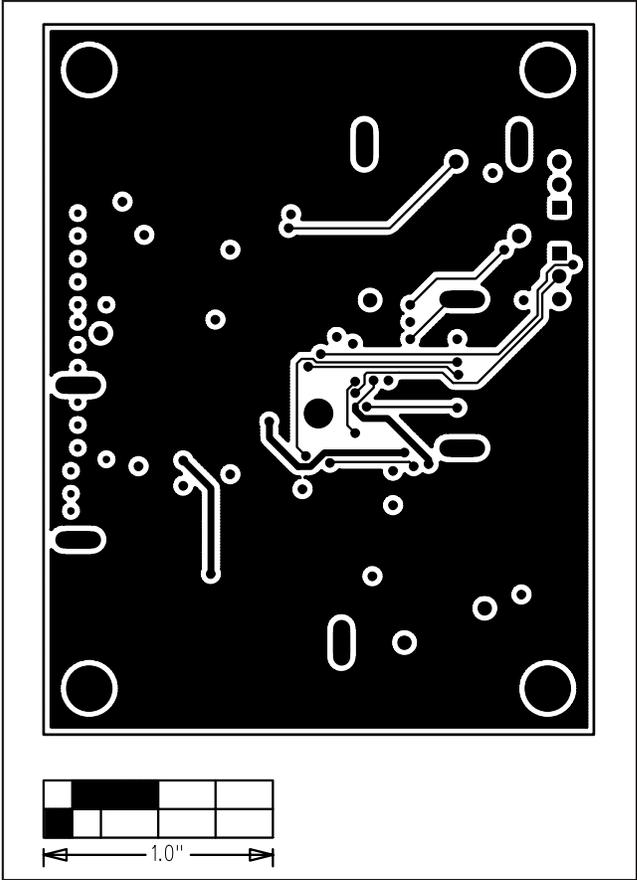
MAX17020 EV Kit PCB Layout—Layer 3 (PGND/Signal Layer)
